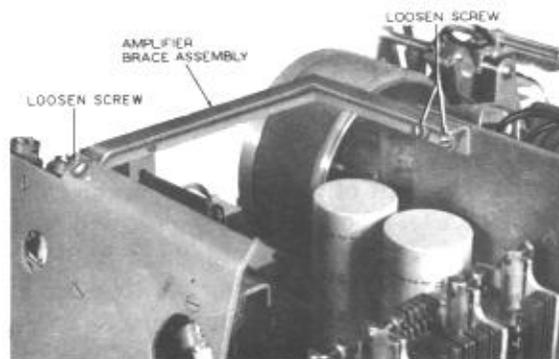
Amplifier Brace Assembly - Early Type Sets
